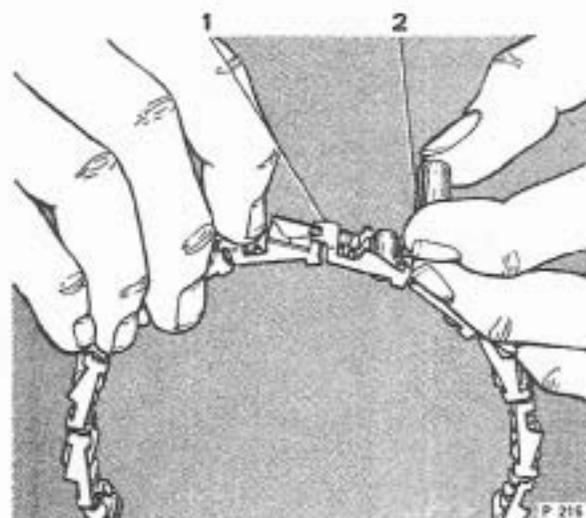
FITTING A ROLLER TO THE ROLLER CLUTCH CAGE (ROLLER CLUTCH)
